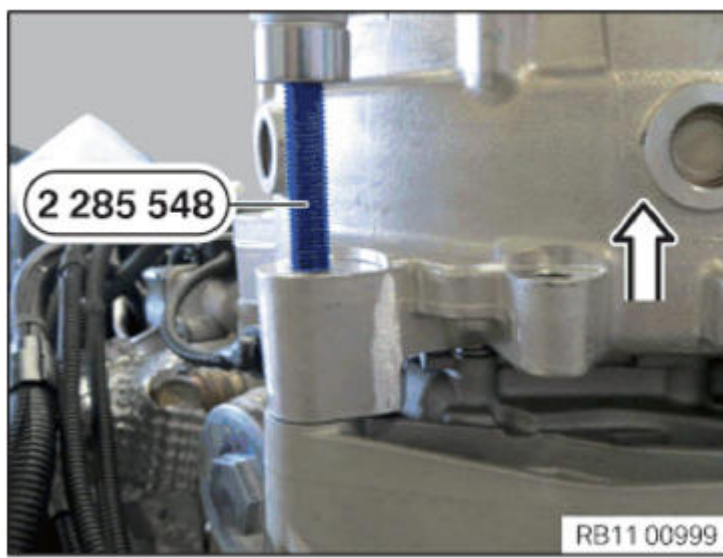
Screwing Special Tool (2 285 548) M10 Into Torsion Spline Shaft Bolting Point
